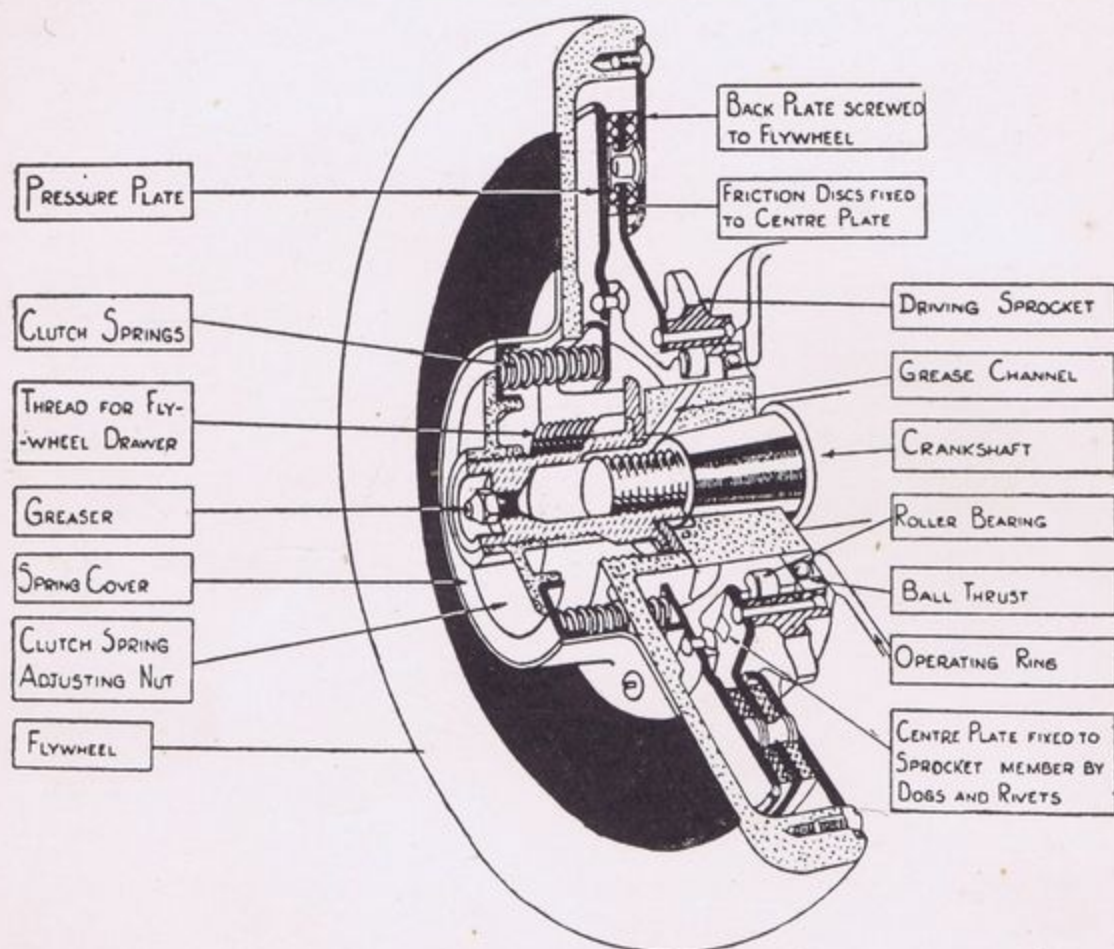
SECTION OF FLYWHEEL CLUTCH
